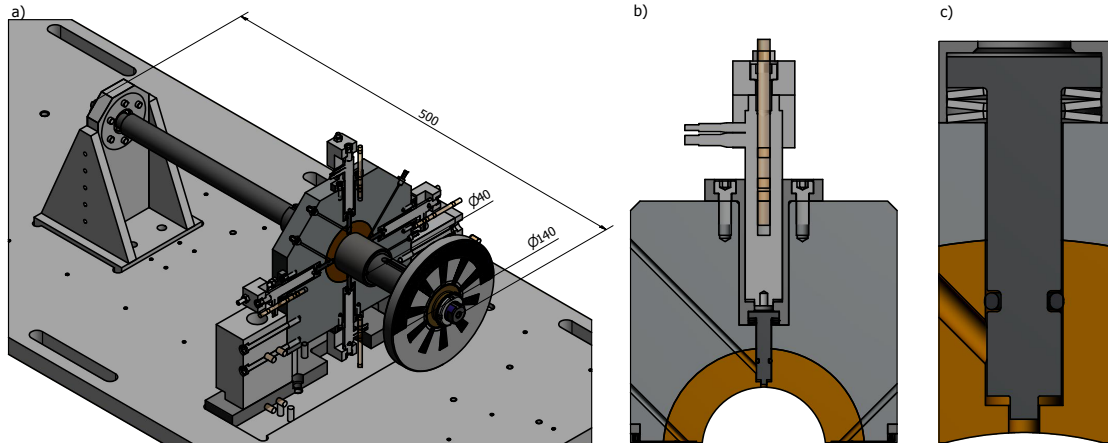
CAD drawing of the test rig: a) the test rig with the controllable gas bearing cut in half. Major dimensions are included in millimetre [mm]. b) zoom of a piezoactuator. The piezo electric stack pushes a pin, which controls the injector opening. c) zoom of the injector pin and journal.
